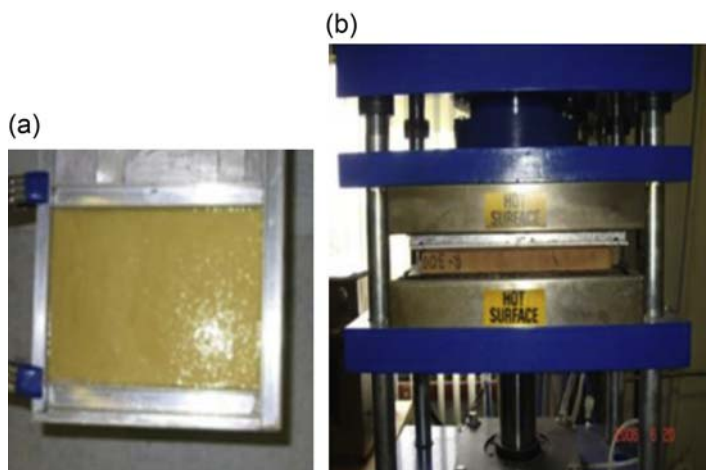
(a) Casting of the foam panel in a mold, and (b) placement of mold in the press.
